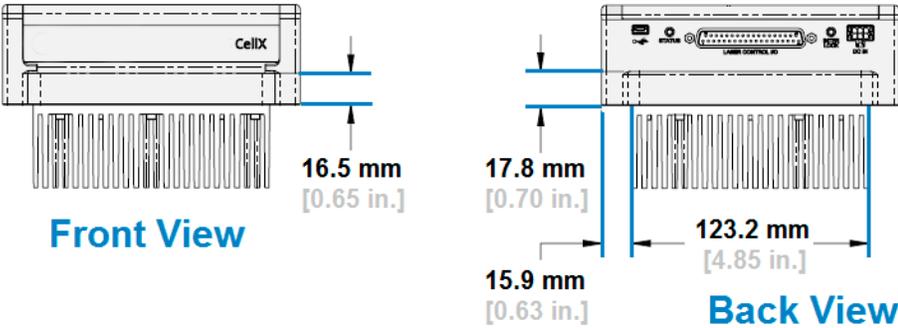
Dimensions - OEM Heat Sink, Front/Back Views
